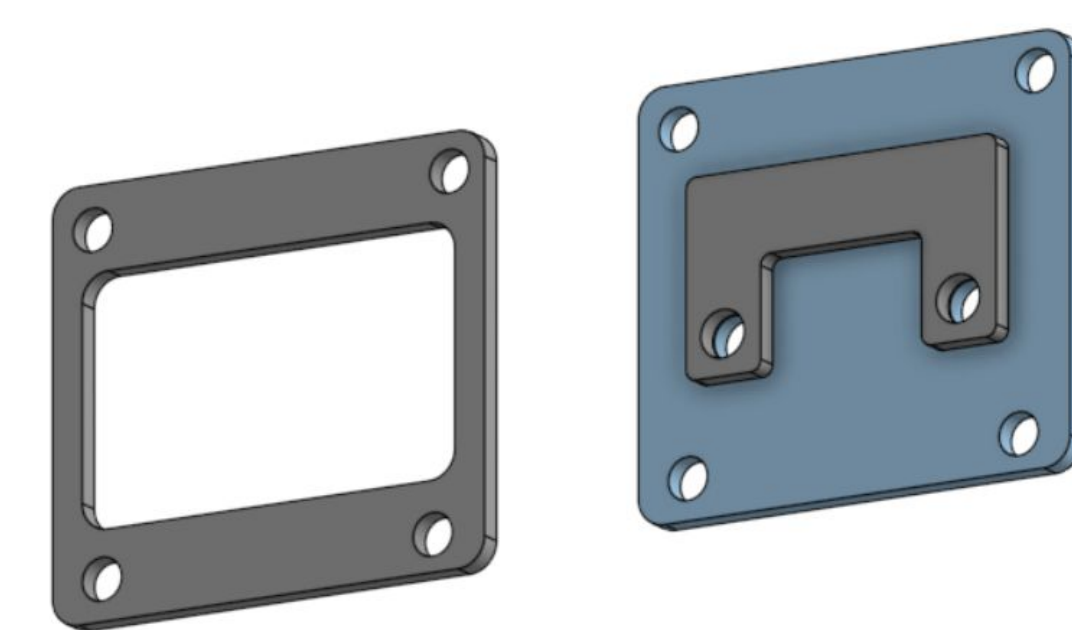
Solidworks assembly of platform for load cell to allow for deflection
